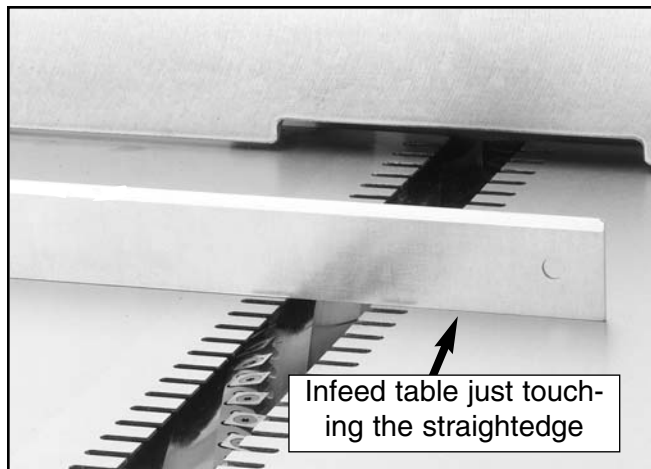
Properly adjusting the infeed table before setting the depth-of-cut scale.
